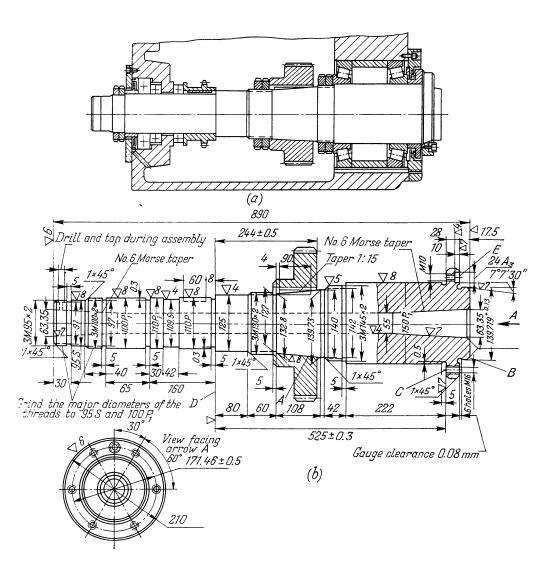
Machine tool spindle: (a) spindle unit; (b) working drawing
